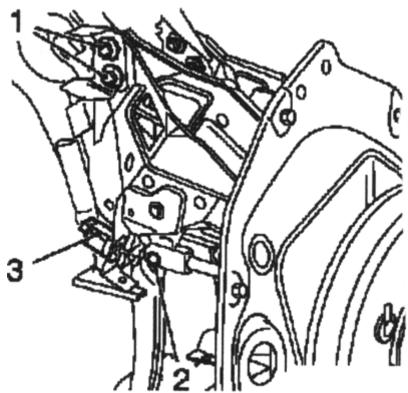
Withdrawal pedal Brakes: 1 - bolts, 2 - attachment bolt brake pedal; 3 - switch braking signal
